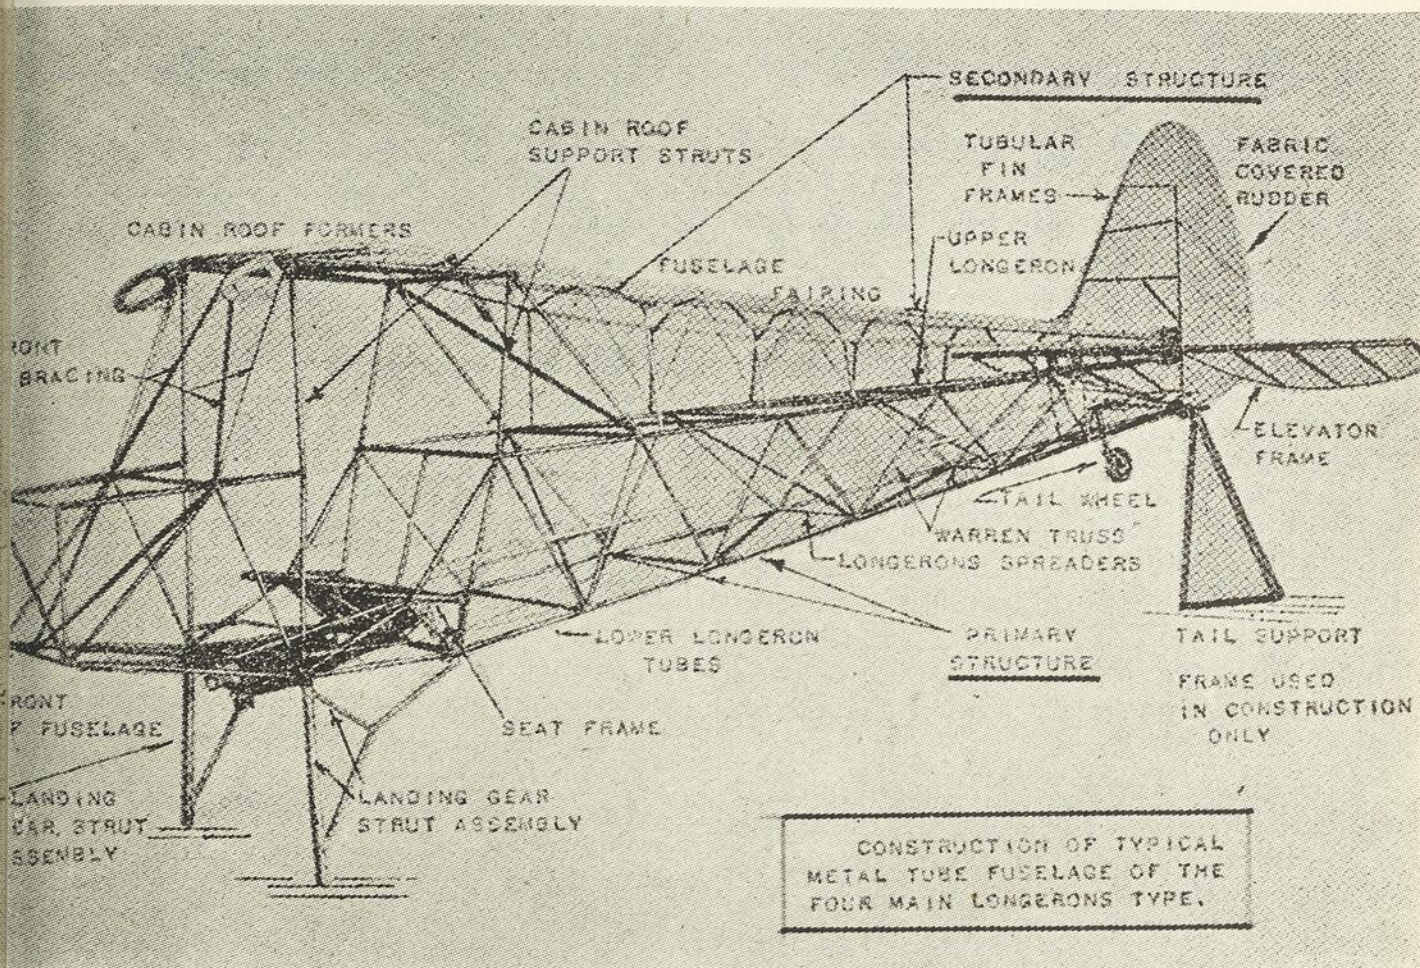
Primary and Secondary Structures of a Welded Steel Tube Fuselage.
